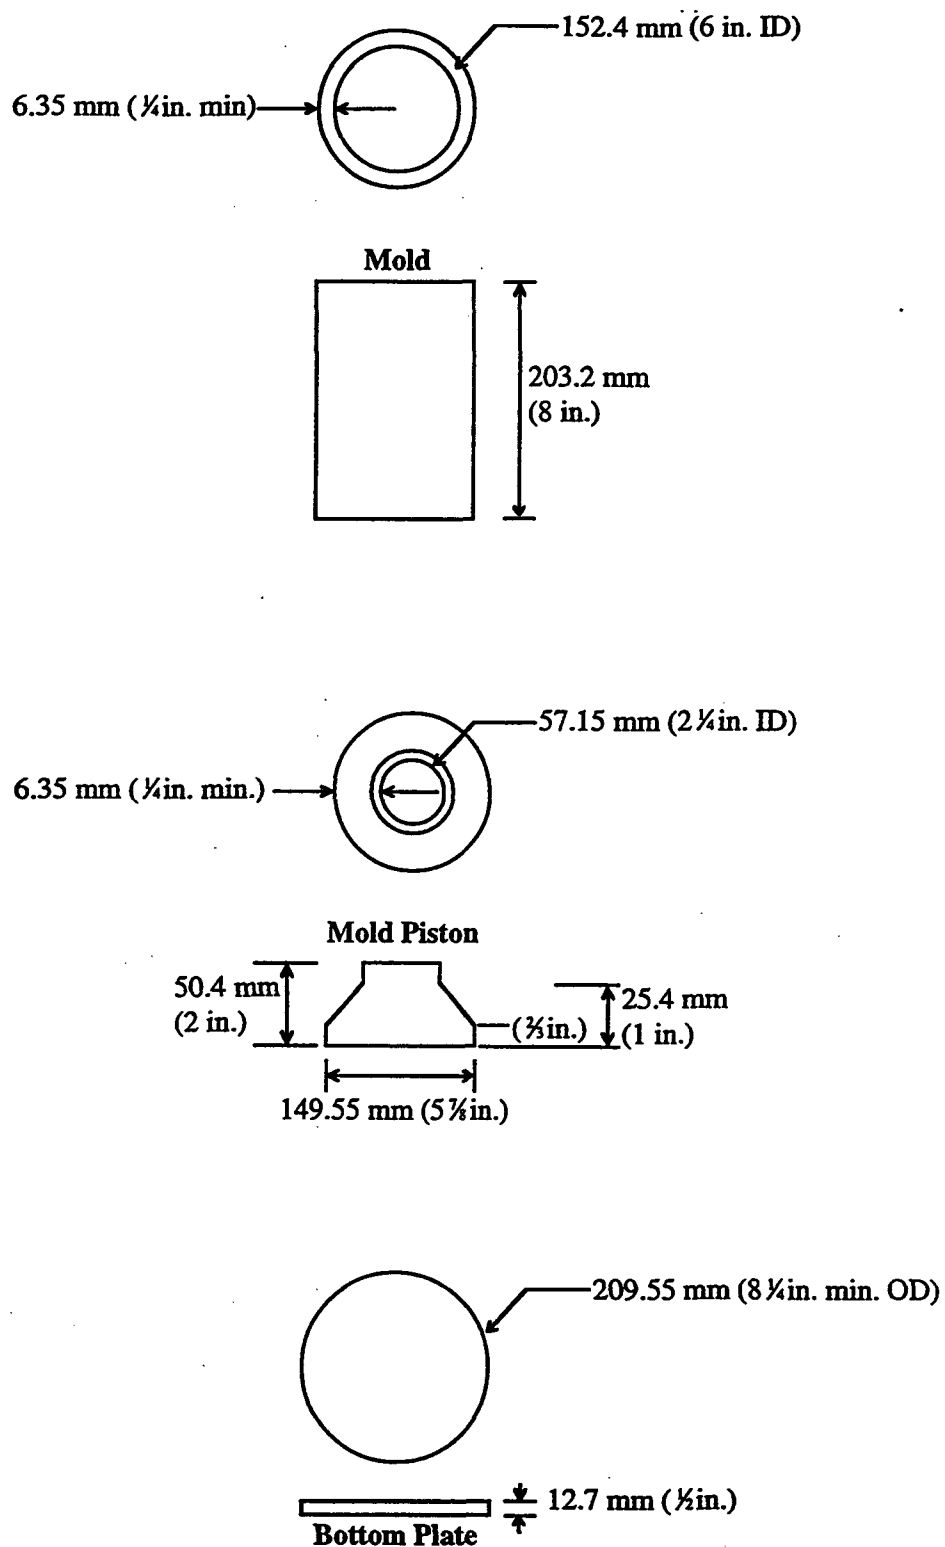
Mold Dimensions (All Dimensions ± 0.051 mm (0.002 in.))
